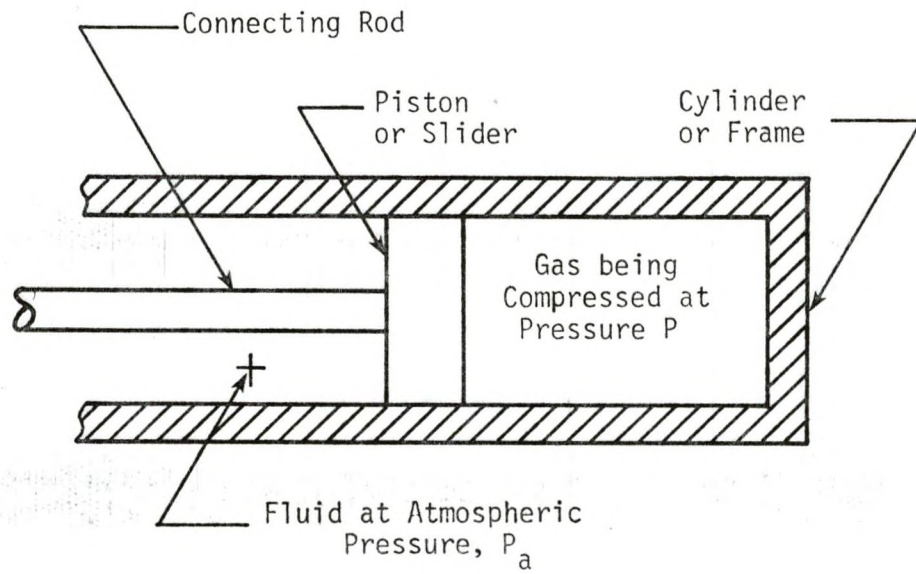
SECTIONED VIEW OF PISTON AND CYLINDER
